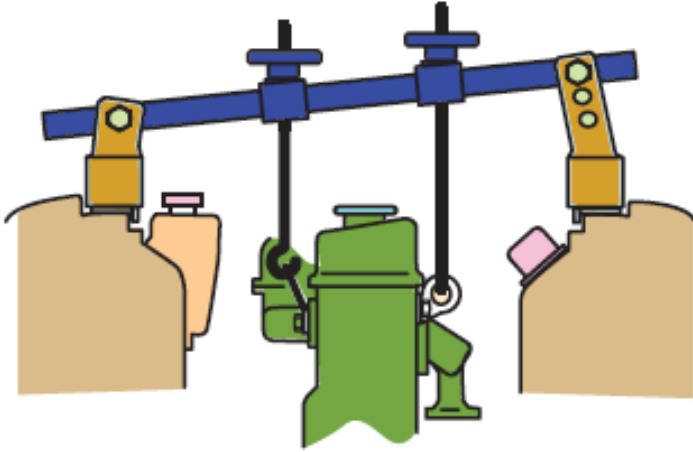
Most front-wheel-drive (FWD) vehicles require the use of a fixture to support the engine before removing the transaxle.
